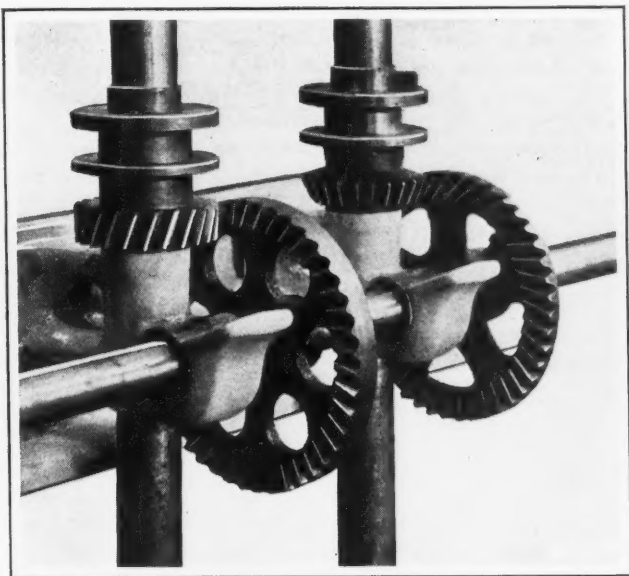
Offset Type of Face Gearing at Left used in Place of Cast Skew Bevel Gears at Right
